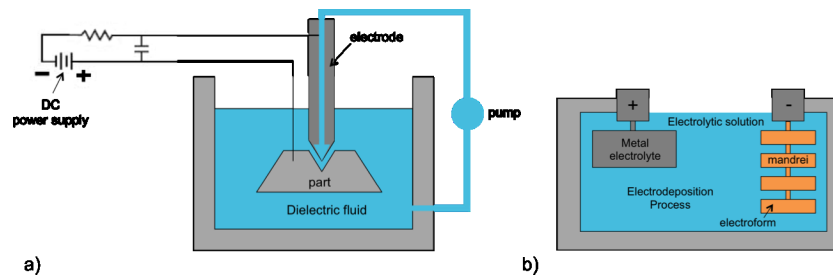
(a) Electric discharge machining (b) metal electroforming.
